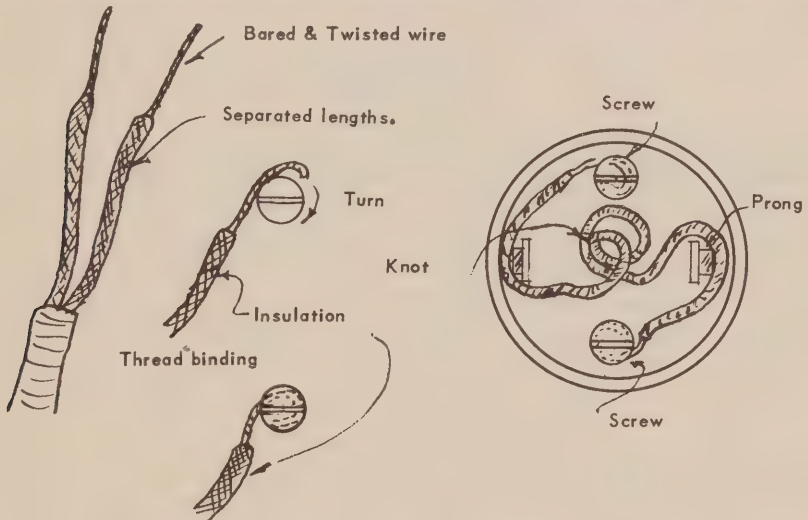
METHOD OF FASTENING CORD TO PLUG
